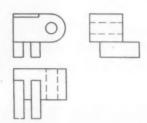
A steel part, the desired tolerance being 0.005 in. which could be reached by repressing the part twice after sintering.
